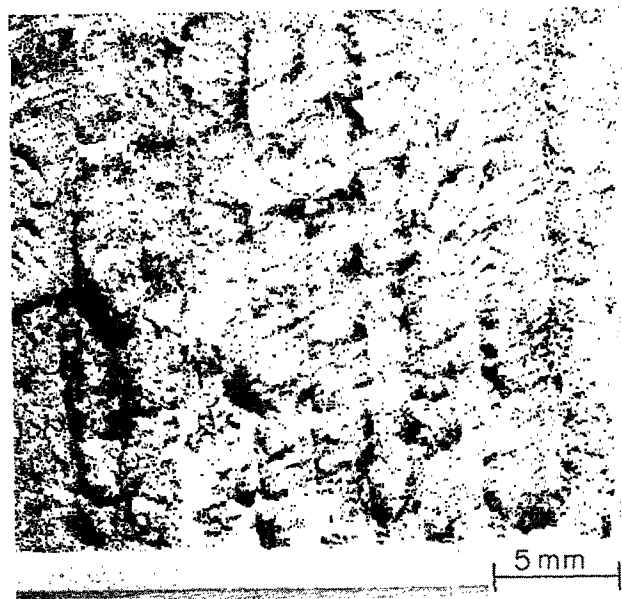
Fracture surface of specimen L, the HY-130 temper-embrittled, GMA weldment
